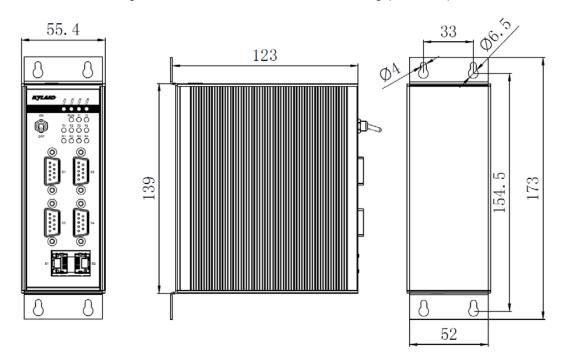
Dimensions for Panel Mounting (Unit: mm)
